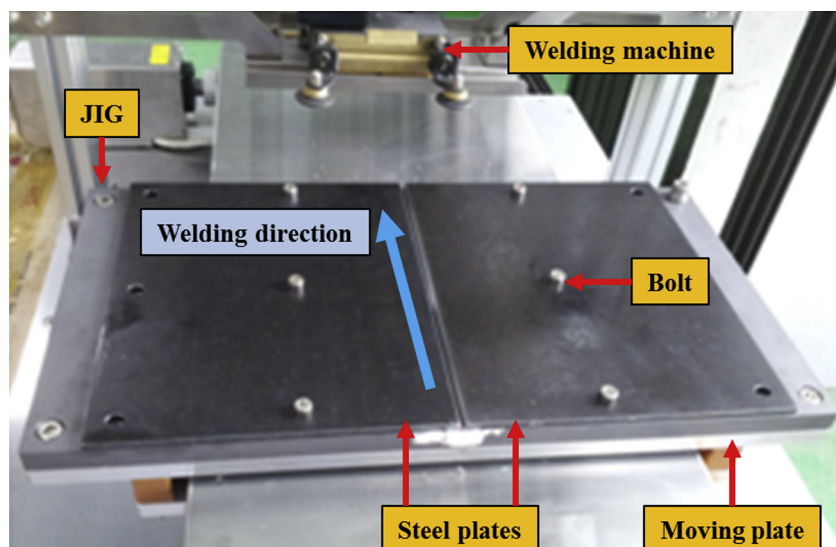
Automatic welding system is consists of welding machine, moving plate, and JIG.
